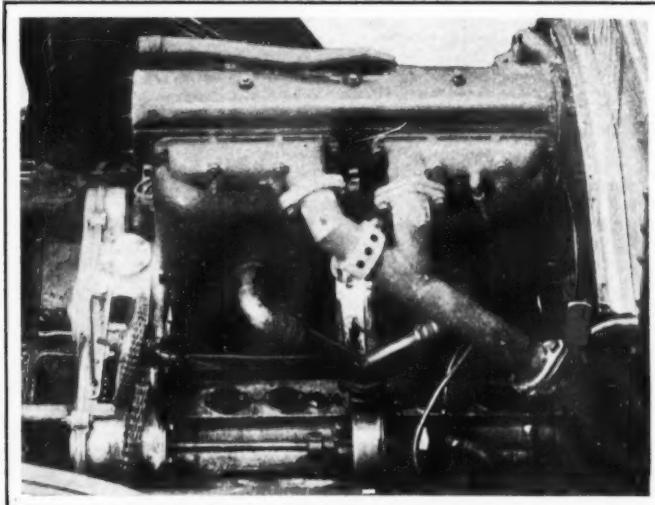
Exhaust side of engine, showing mounting of valve housing
